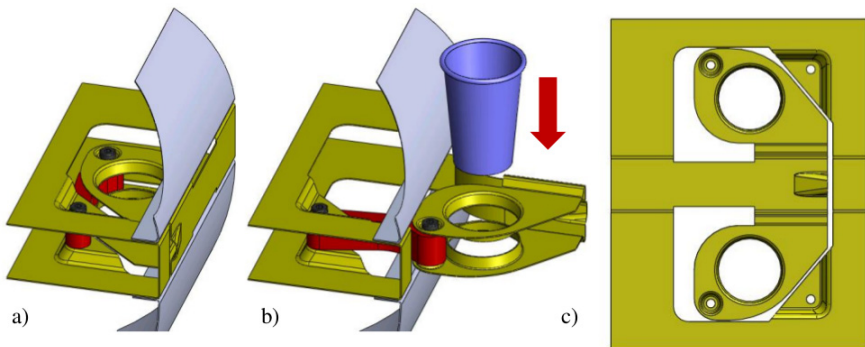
CAD model of the compliant cup holder mechanism: a) closed position b) open position c) unfolded textile preform of fibre reinforced material
